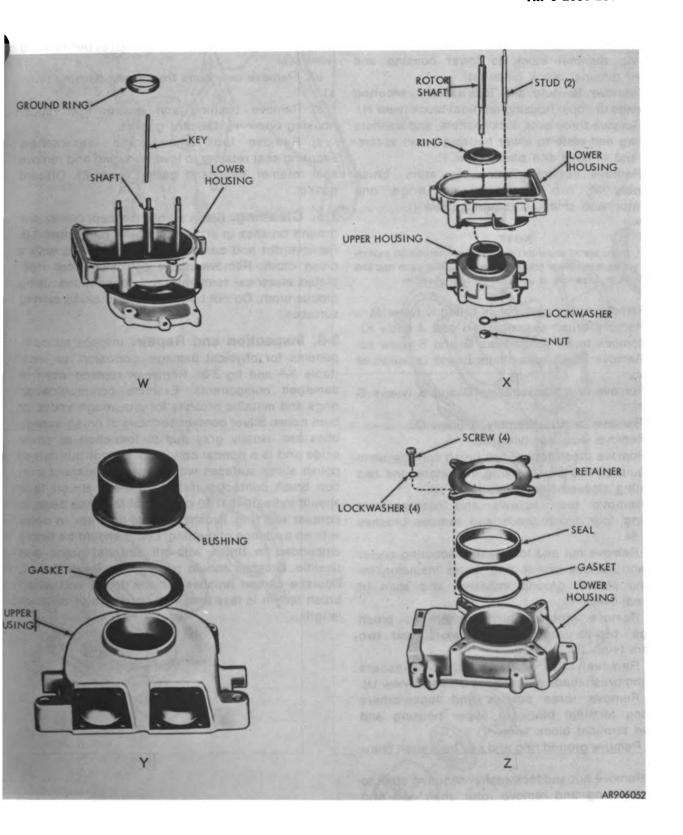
Slipring box disassembly or assembly (7 of 7).
